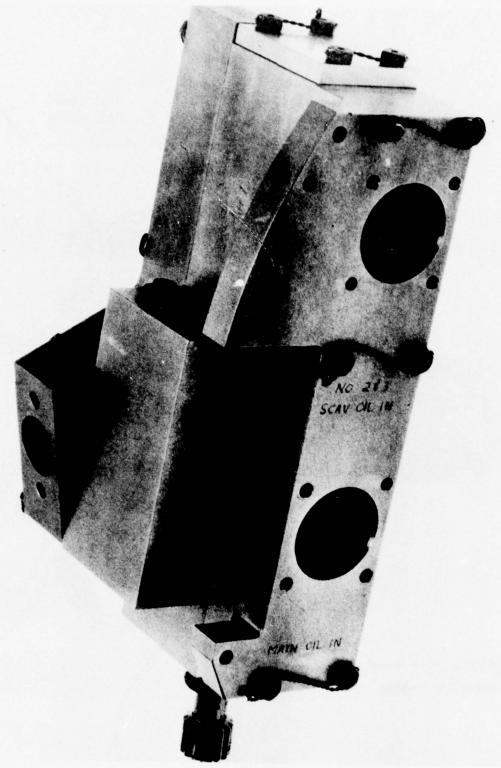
High-Speed Supply and Scavenge Pump Assembly
